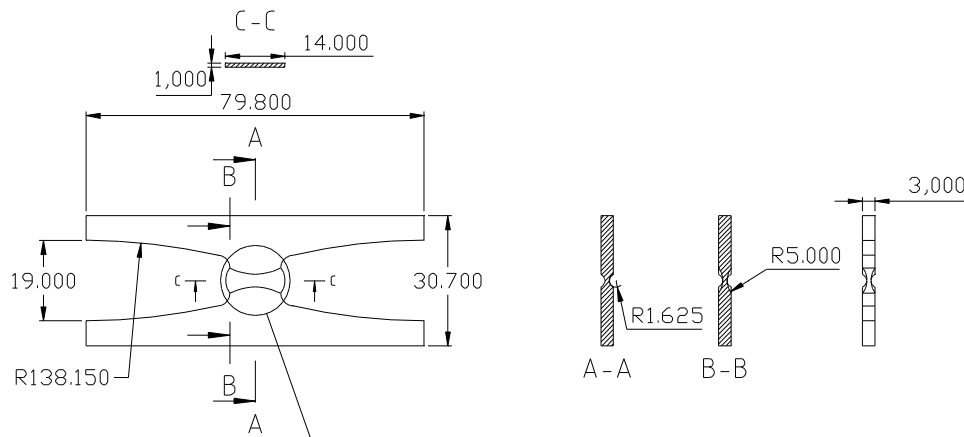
The geometry for butterfly specimen. Dimension in (mm). Taken from Bai [2].
